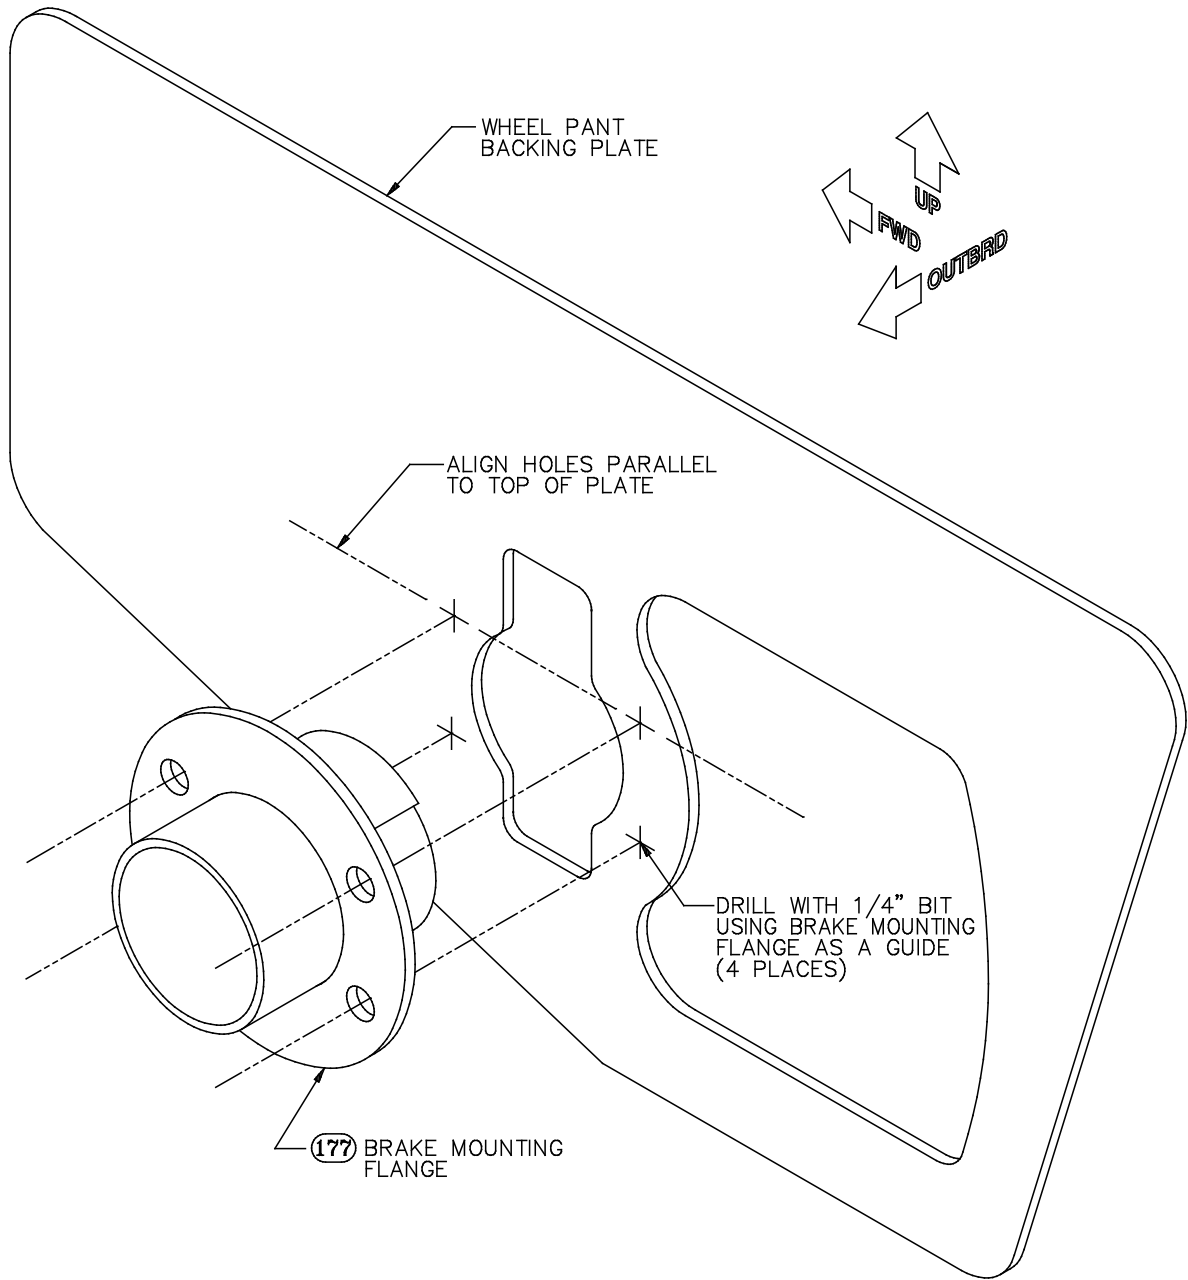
Drilling the Wheel Pant Backing Plate Bolt Holes
